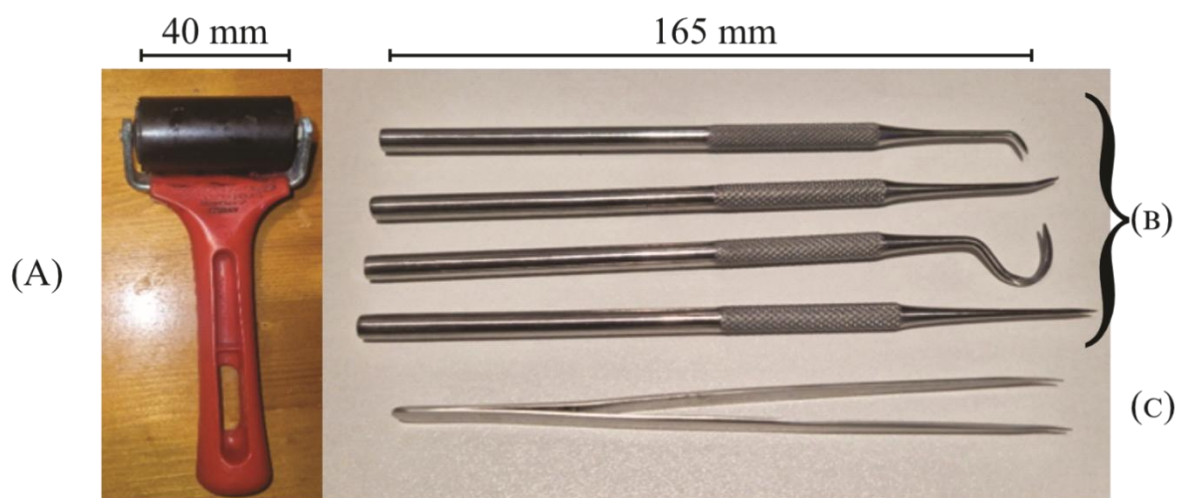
hand tools used in reworking; (A) roller, (B) hook and pick tool set, (C) tweezers
